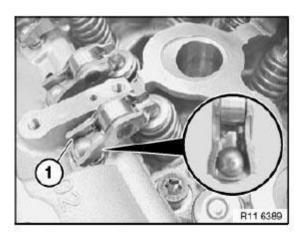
Identifying Cam Followers Courtesy of BMW OF NORTH AMERICA, INC.
